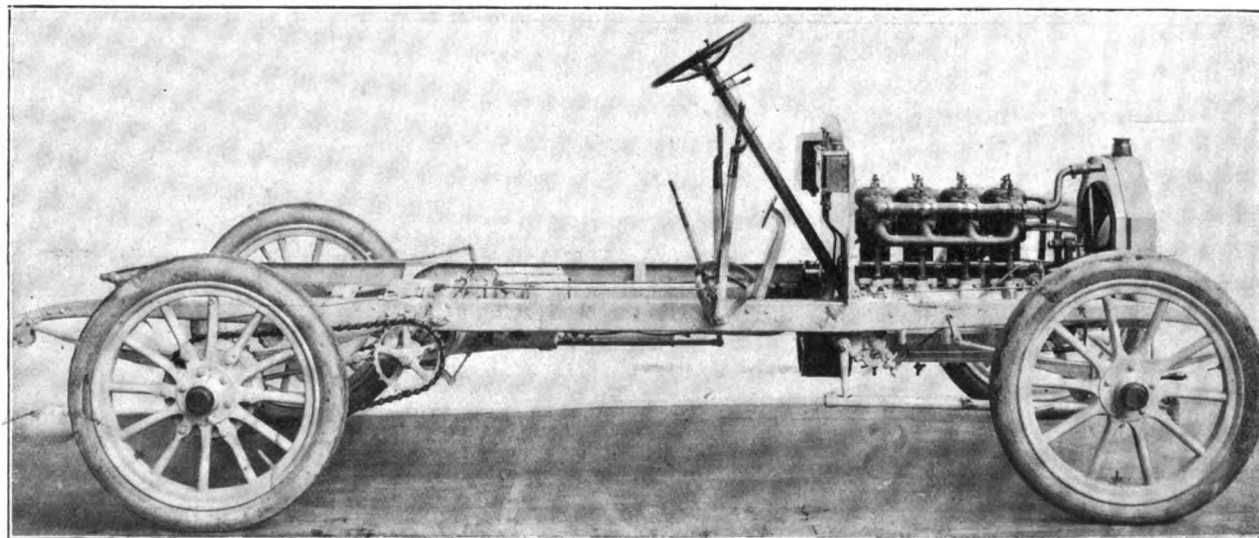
Elevation of Chassis of Cottareau 20-25-h.p. Four-Cylinder Car.
